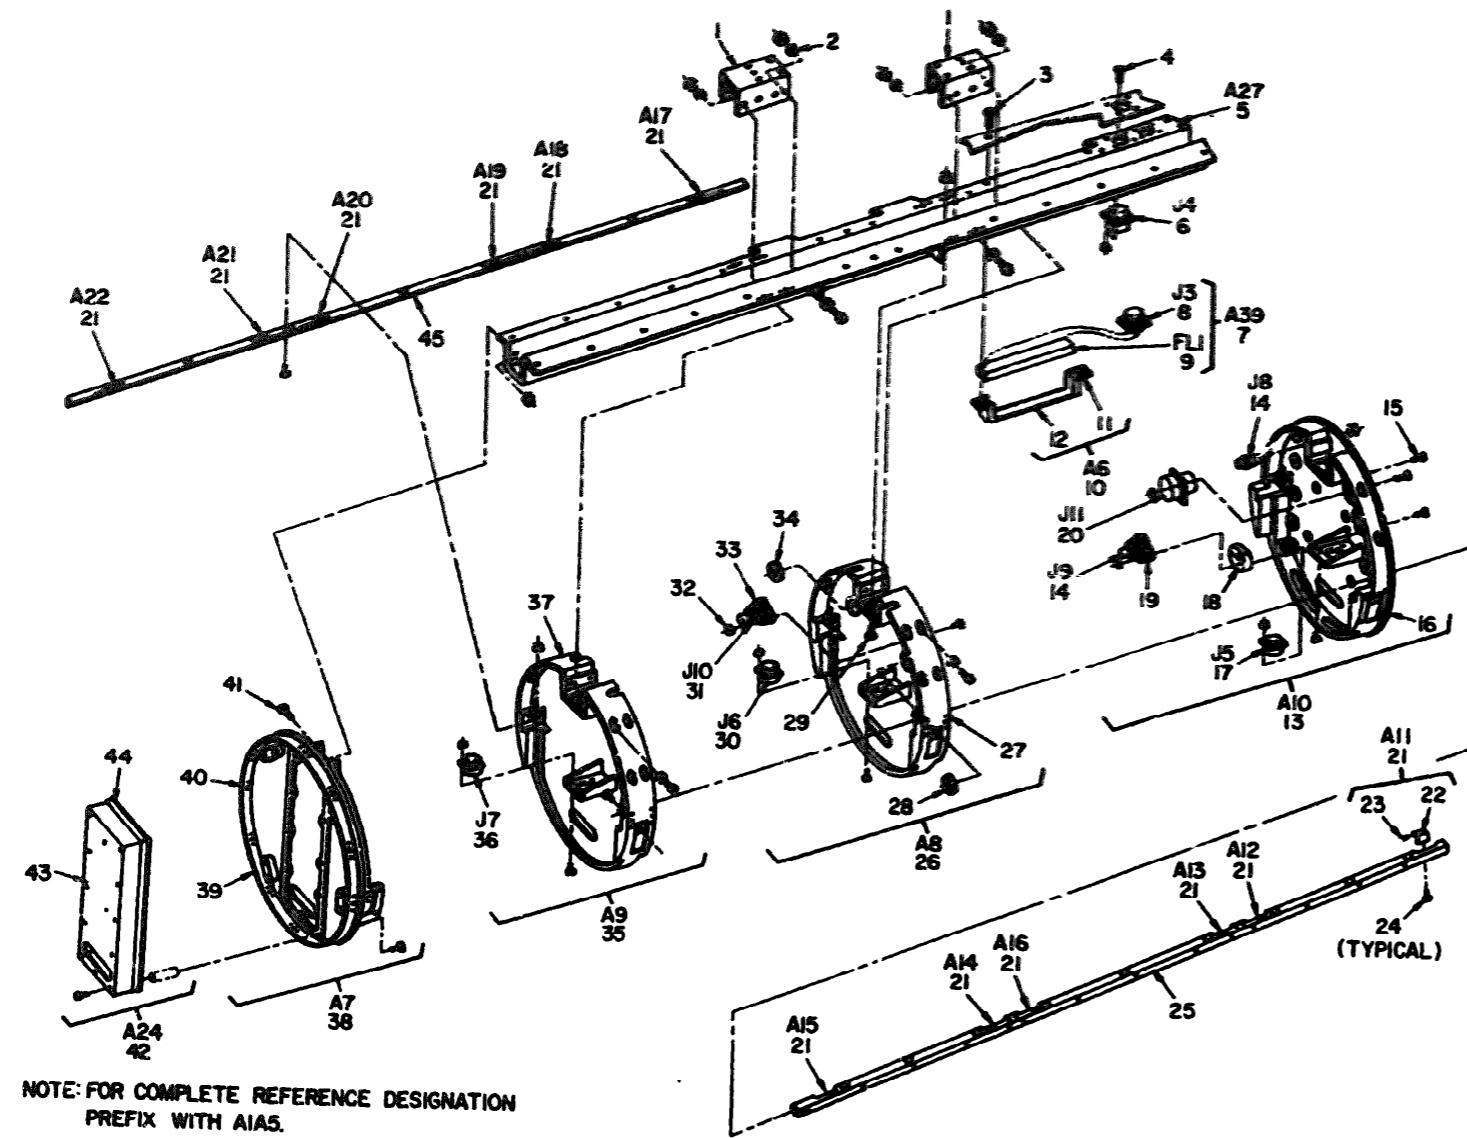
Pod Assembly LA-388A (A1A5), Covers Removed.
